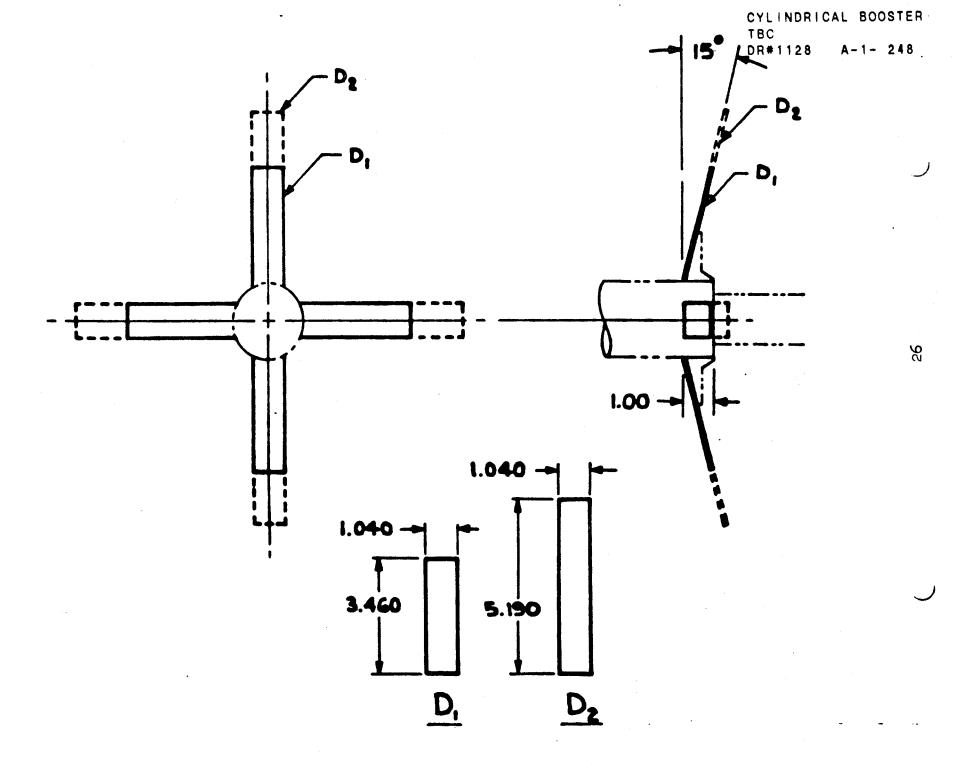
Drag Petals Sting Mount, D_1 and D_2
